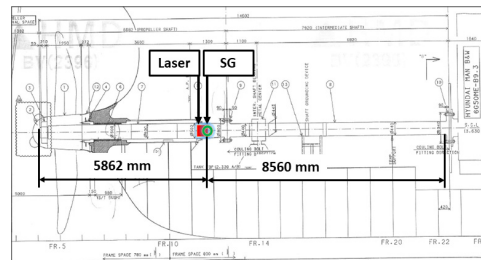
Shaft arrangement and strain gauge and laser sensor position
